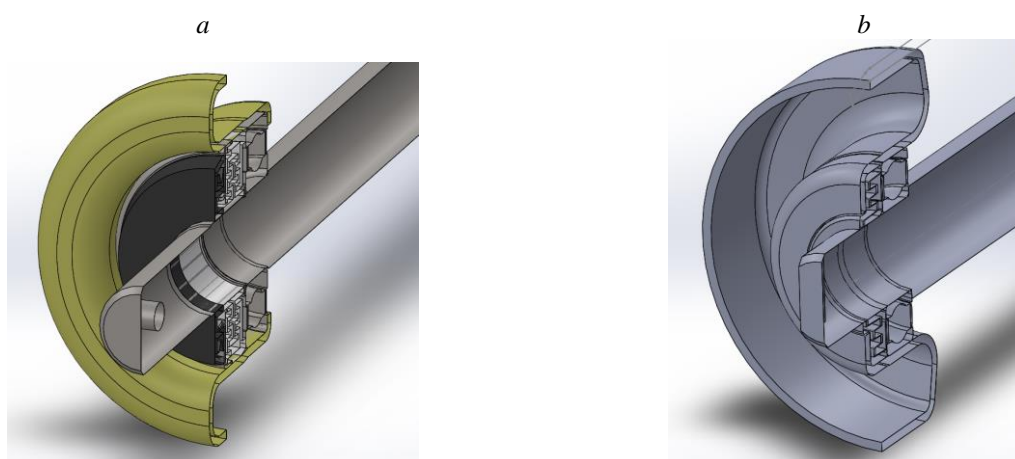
Typical designs of conveyor roller bearing seals: *a* - open case; *b* - closed case
